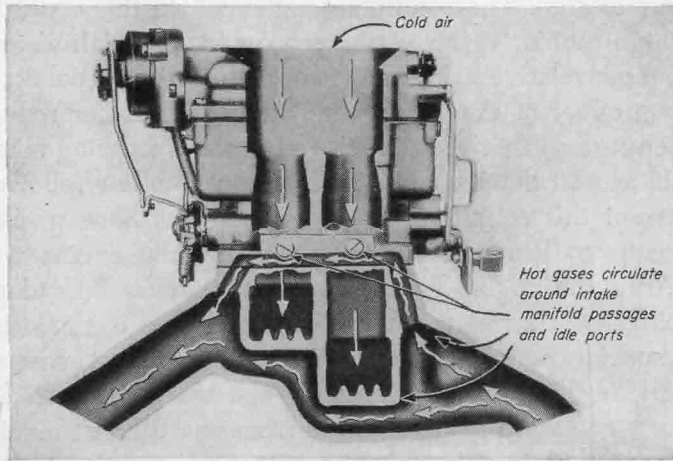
Intake manifold and carburetor idle-ports heating passages. Hot exhaust gases heat these areas as soon as the engine starts. (Cadillac Motor Car Division of General Motors Corporation)
